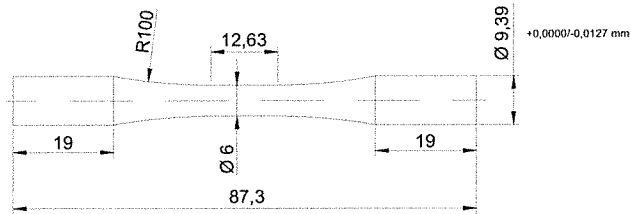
Geometry and Dimensions (mm) of the Fatigue Specimens.
